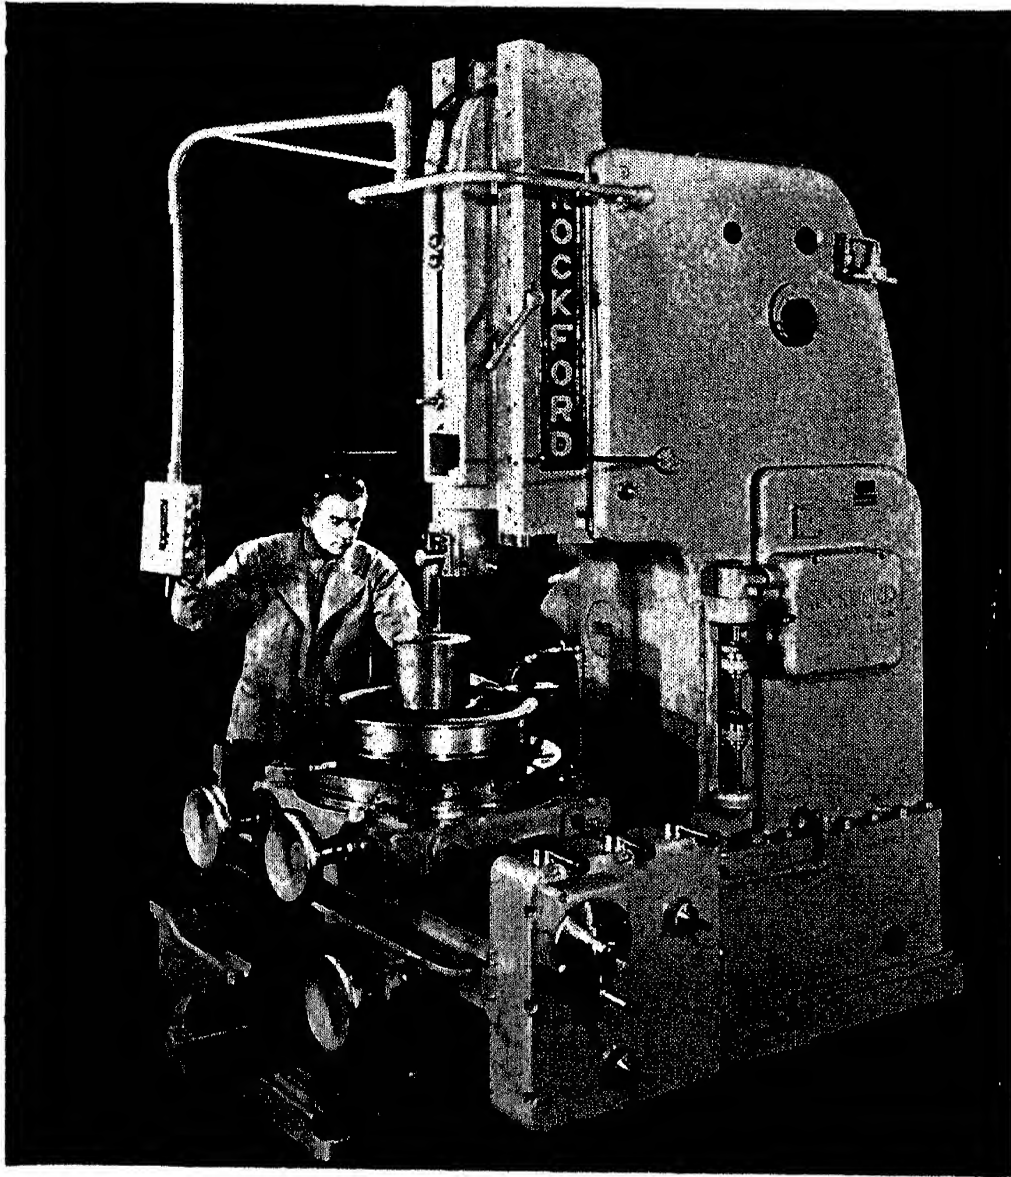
A 20 in. hydraulic vertical shaper or slotter machining an internal keyway. (Courtesy Rockford Machine Tool Co.)
